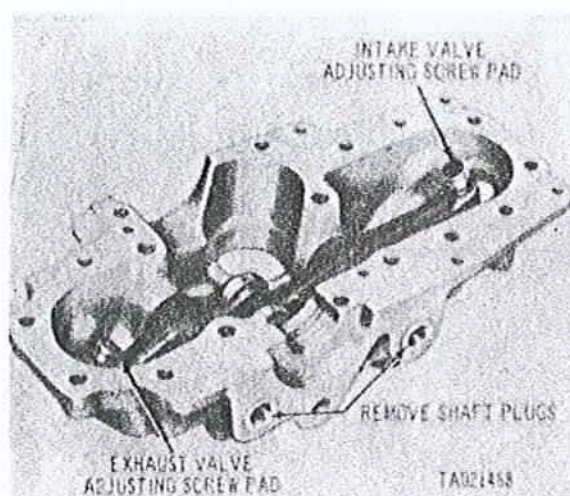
Removing or installing valve rocker arm shaft plugs.
